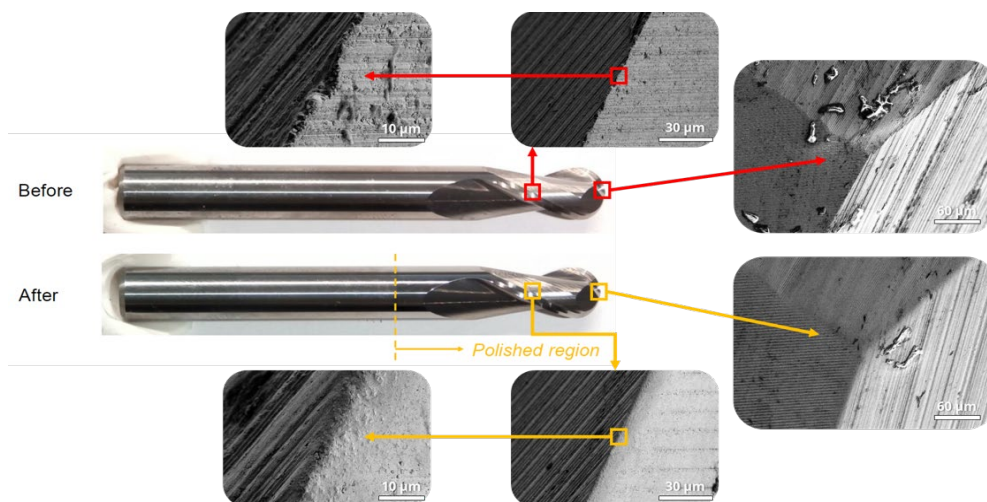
Tool before and after dry electropolishing with smoother surface and honed cutting edge without big defects.
